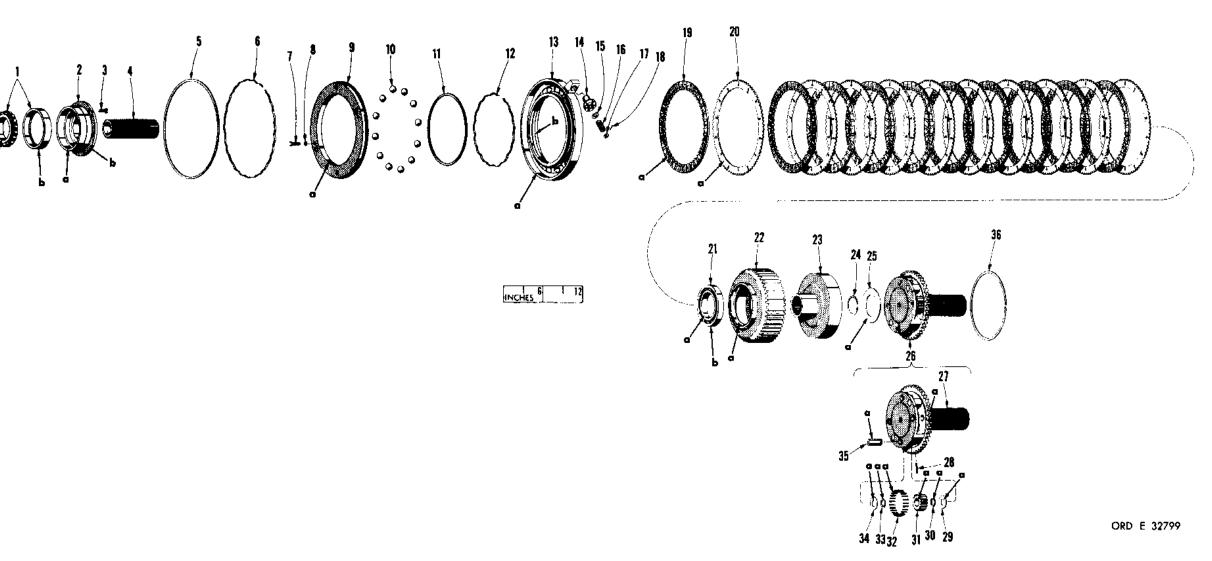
Fold-out 9 — Right brake, and steer planetary — exploded view
